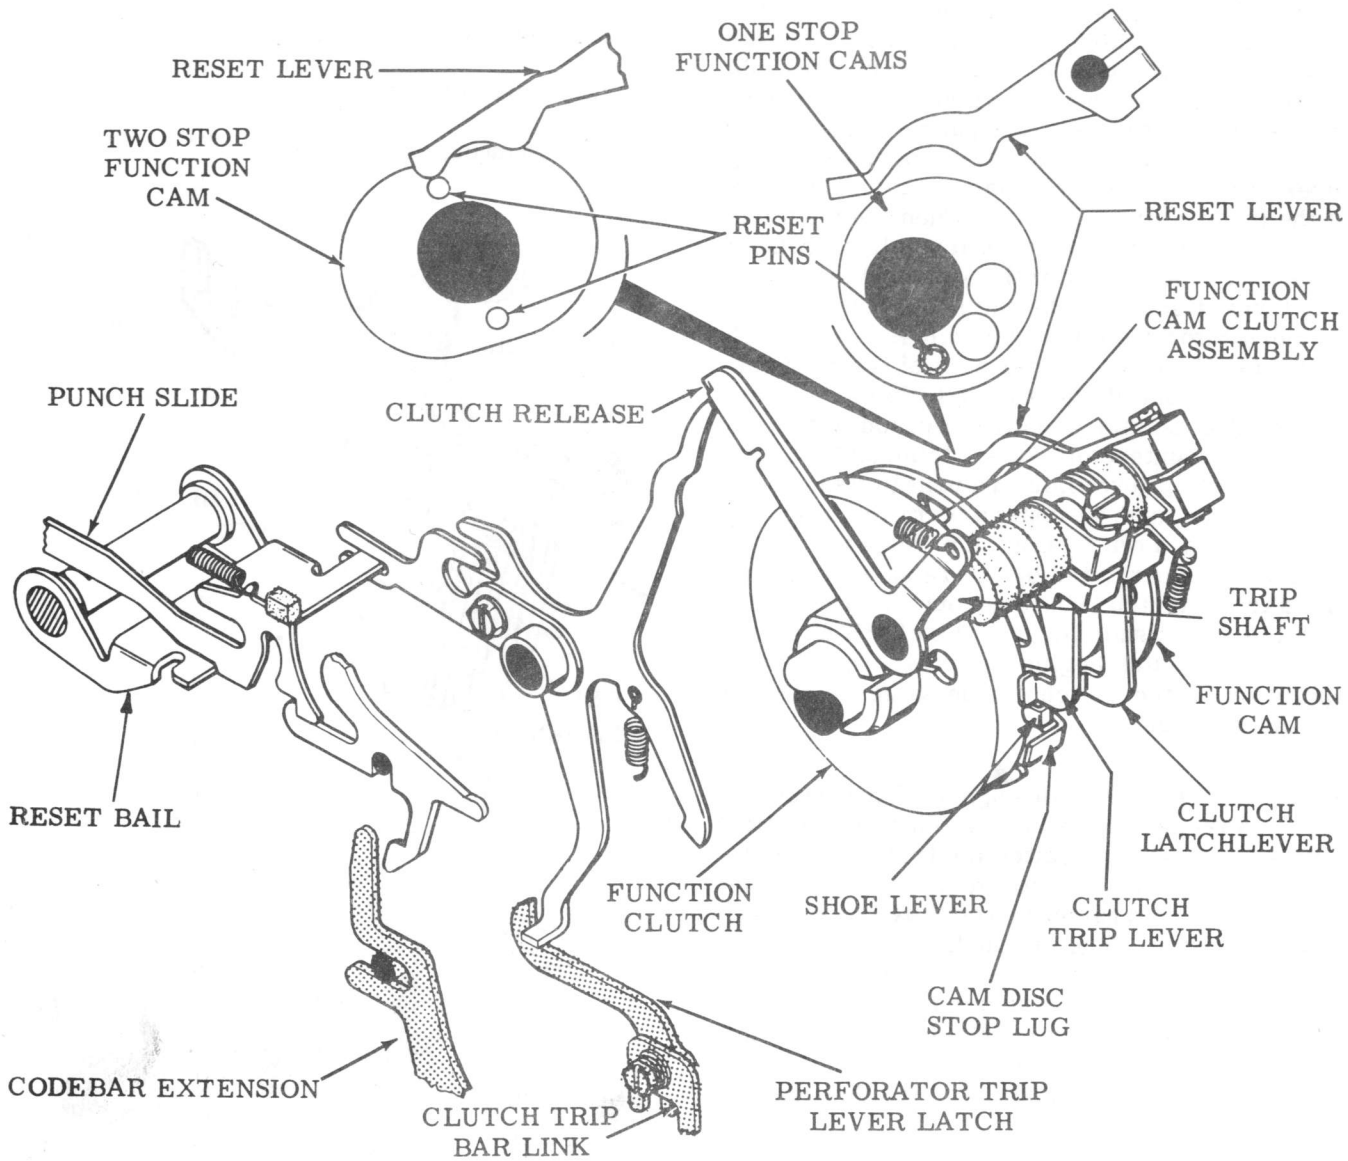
Function Cam Clutch and Clutch Trip Assembly
